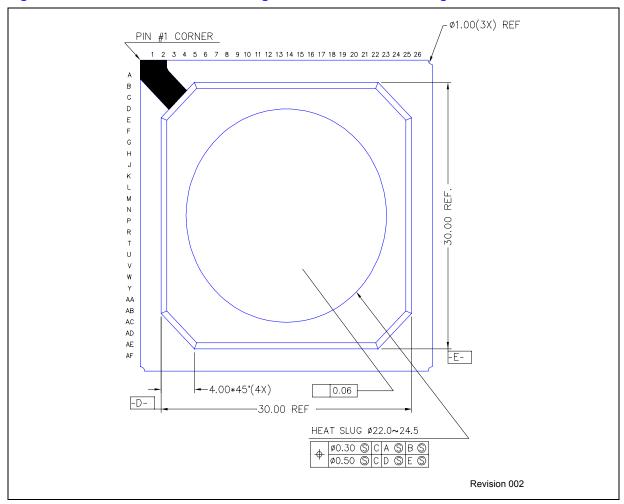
544-Pin Lead PBGA Package — Second of Two Drawings
